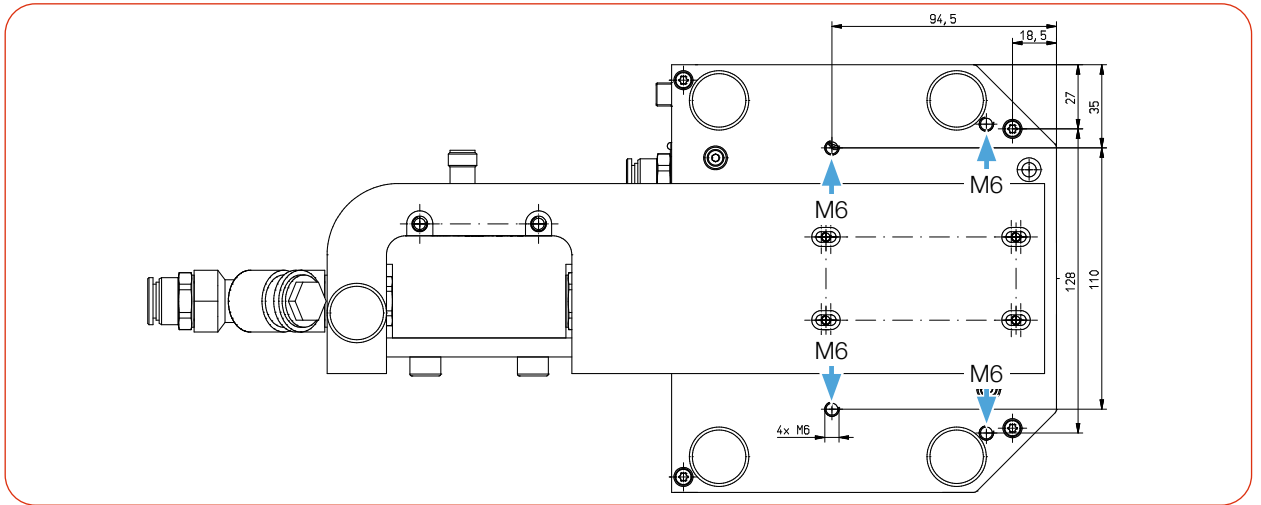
Mounting threads M6 in the bottom of the housing of the CPM F-10 with oval wheel meter (dimensions in mm)
